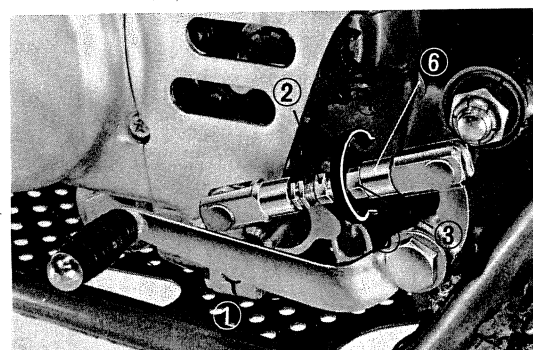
① Gear change pedal ② Lock nut (lefthand thread) ③ Adjuster ④ Raise ⑤ Lower ⑥ Lock nut
